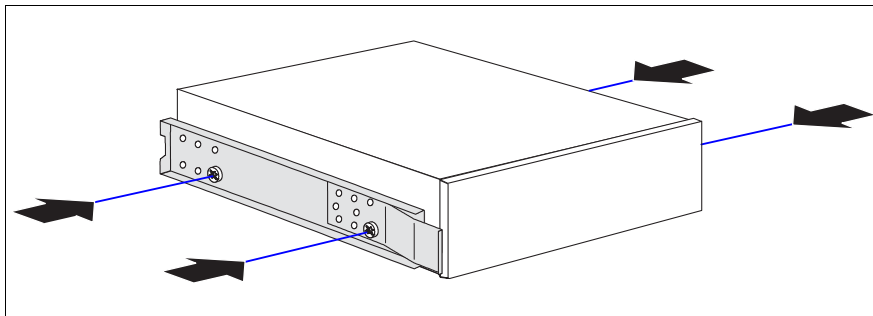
Attaching the EasyClick rails - tape drives LTO Ultrium 2HH / 3FH
